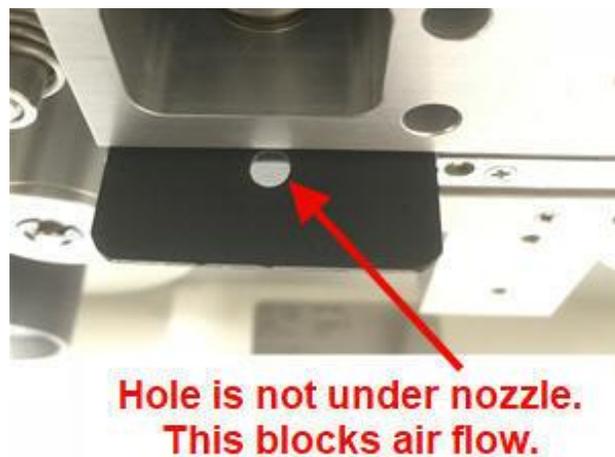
Nozzle Seal Tool with Solid Side Under the Nozzle
